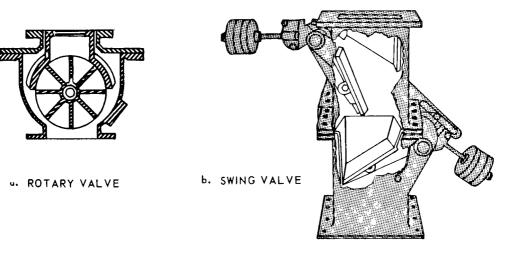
Hopper discharge valves. (a) Rotary valve and (b) swing valve.
